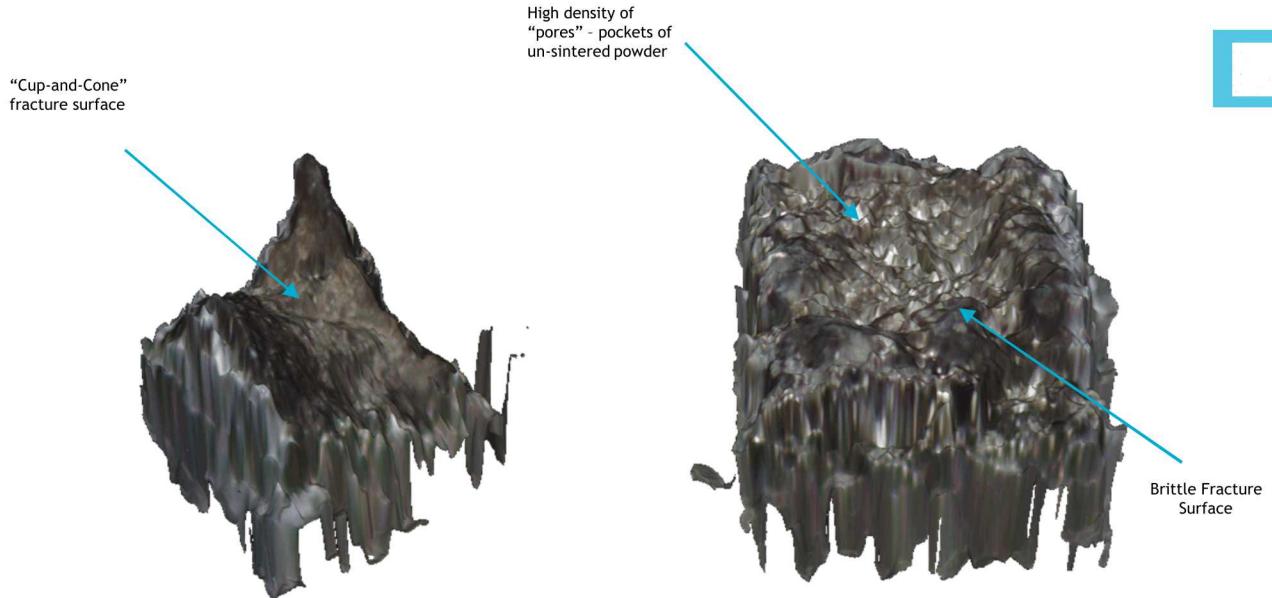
3D Imaging of a fracture surface from a “good” material lot
